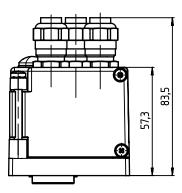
Dimensioned drawing MS 301 connection hood
